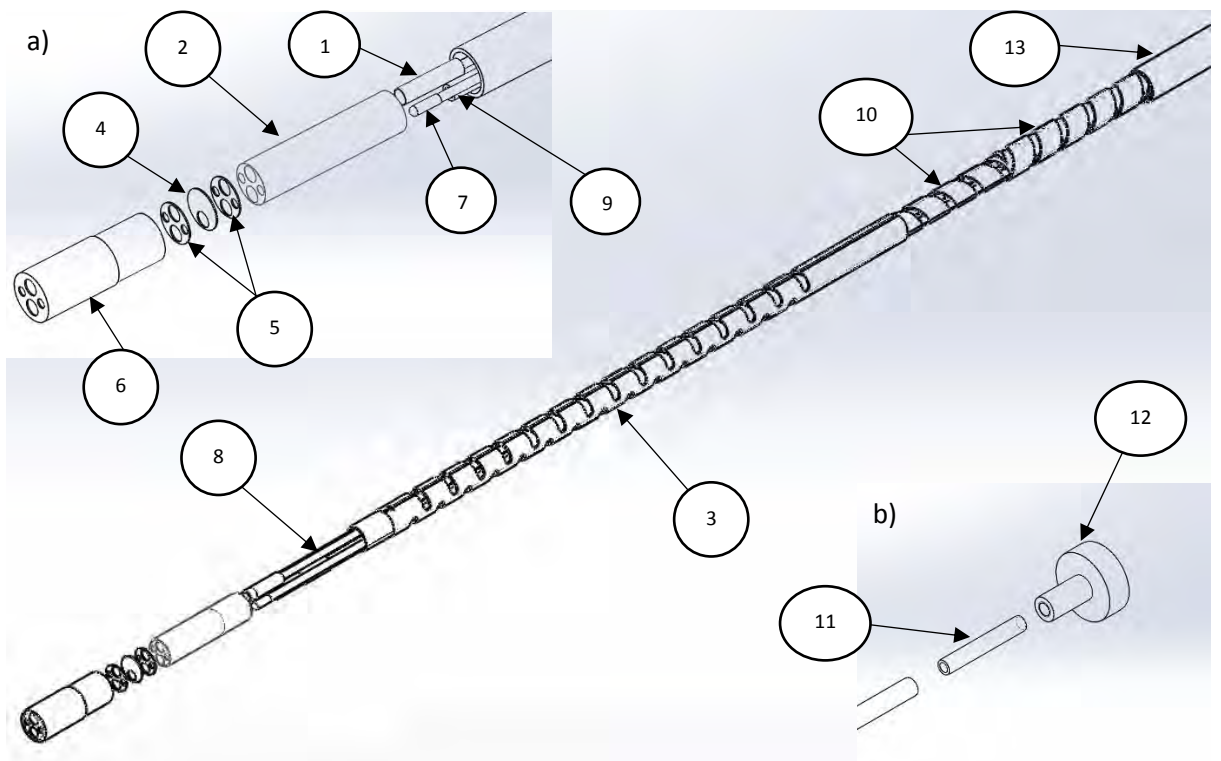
The exploded view of the insertion tube. Insert a) shows the distal end of the tube while insert b) shows the proximal end components
